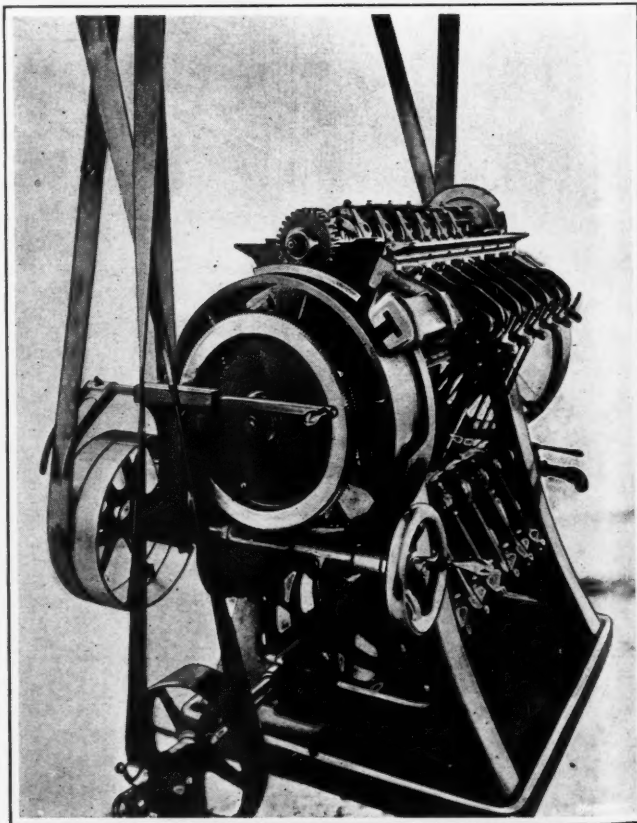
Semi-automatic Machine built by Langelier Mfg. Co. for drilling Pneumatic Tire Valve Stems. On this Machine Provision is made for automatically backing out Drill at Specified Intervals to provide for clearing Chips from Hole
